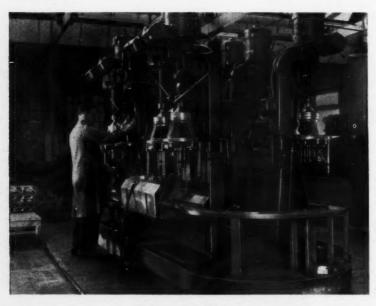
This group of machines connected by a closed-loop trolley-jig track provides for drilling and tapping holes in the meter bodies after the liners have been inserted
